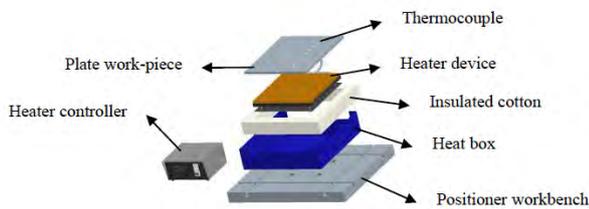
FIGURE II. EXPLODED-VIEW OF HEATING SYSTEM FOR THERMAL MACHINING
